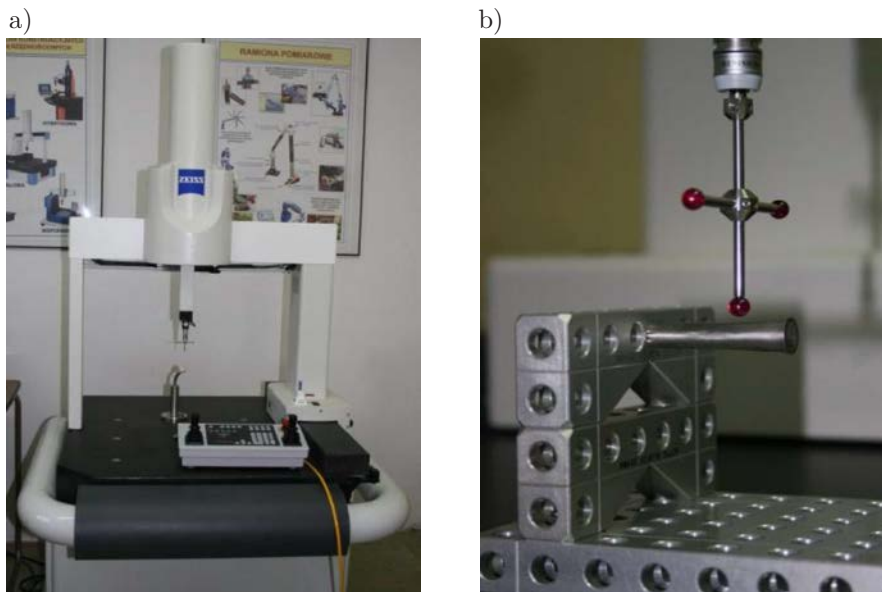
a) The Carl Zeiss measuring machine; b) the sample shape measuring process [2].
